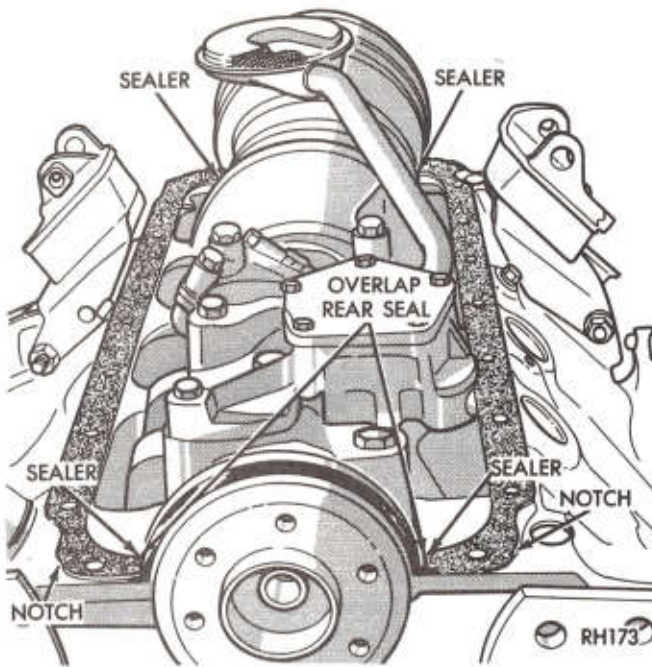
Oil Pan Gaskets and Rear Seal Installation
